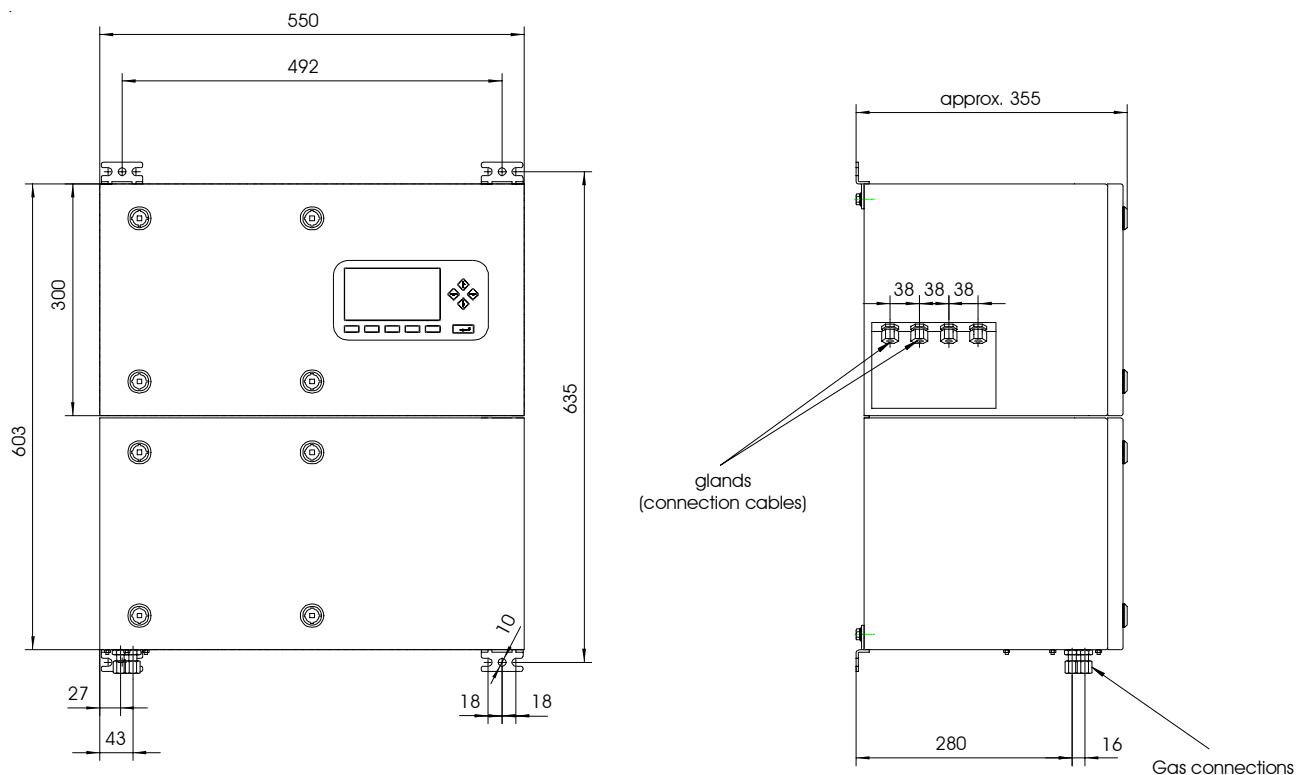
Dimensional sketch / Drill drawing MLT 2 Dual housing version [all dimensions in mm]
